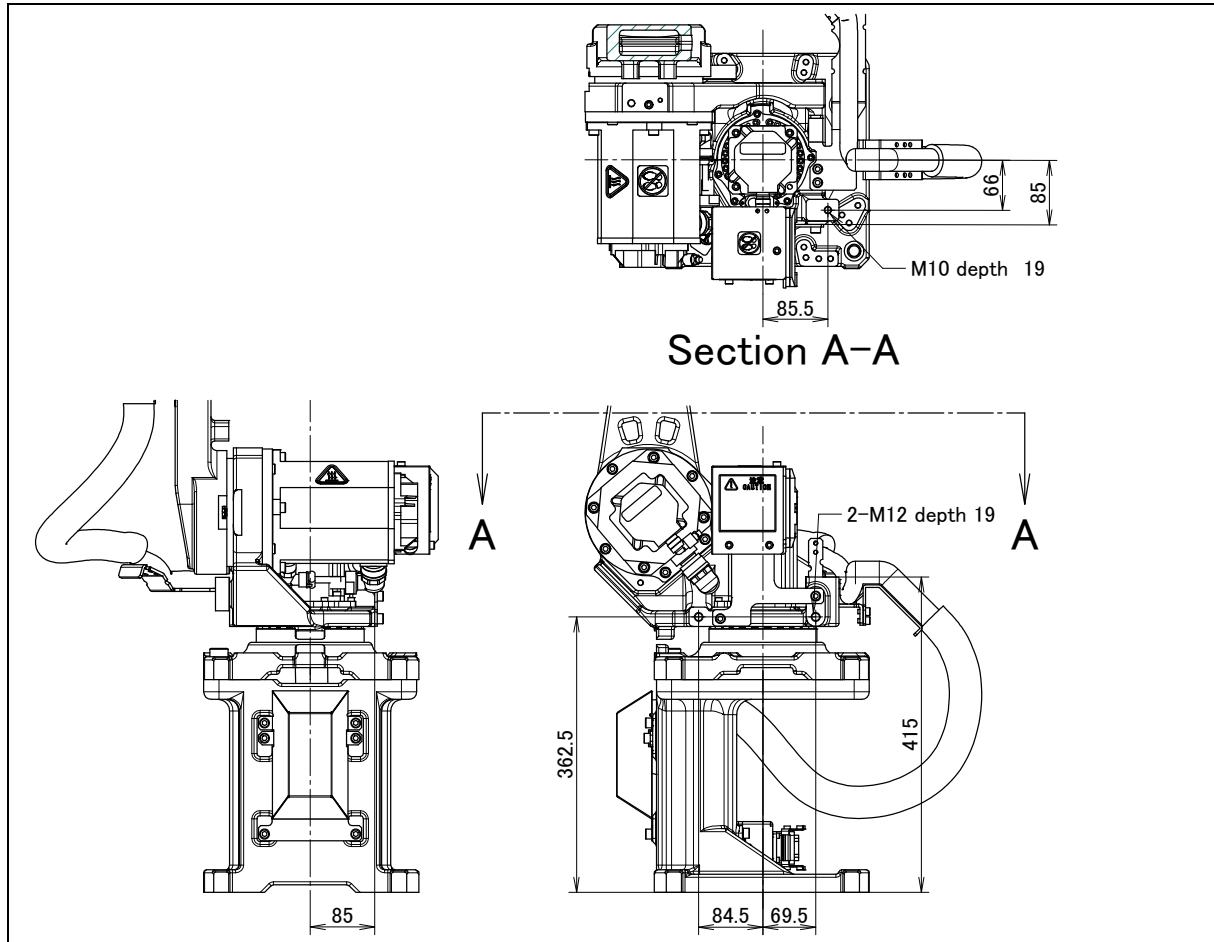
(b) Weld equipment mounting diameter (J2 base) (only for with pedestal)
